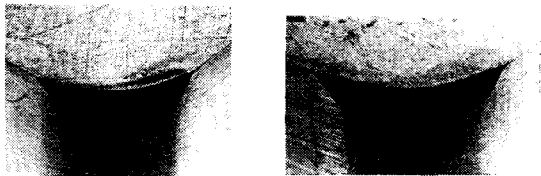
SEM photographs of the worn cutting edge of P10 tool in dry machining of the ceramic presintered at 800°C < $V=30\text{m/min}$, $T=30\text{min}$ >
